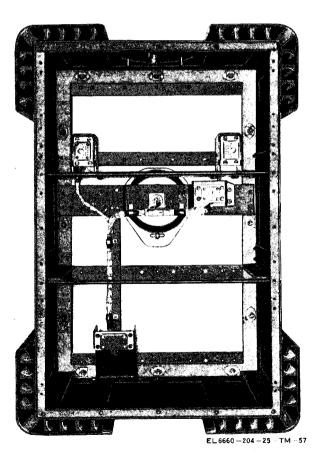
Electrical equipment cabinet CY-1390()/TMQ-5, components removed.
